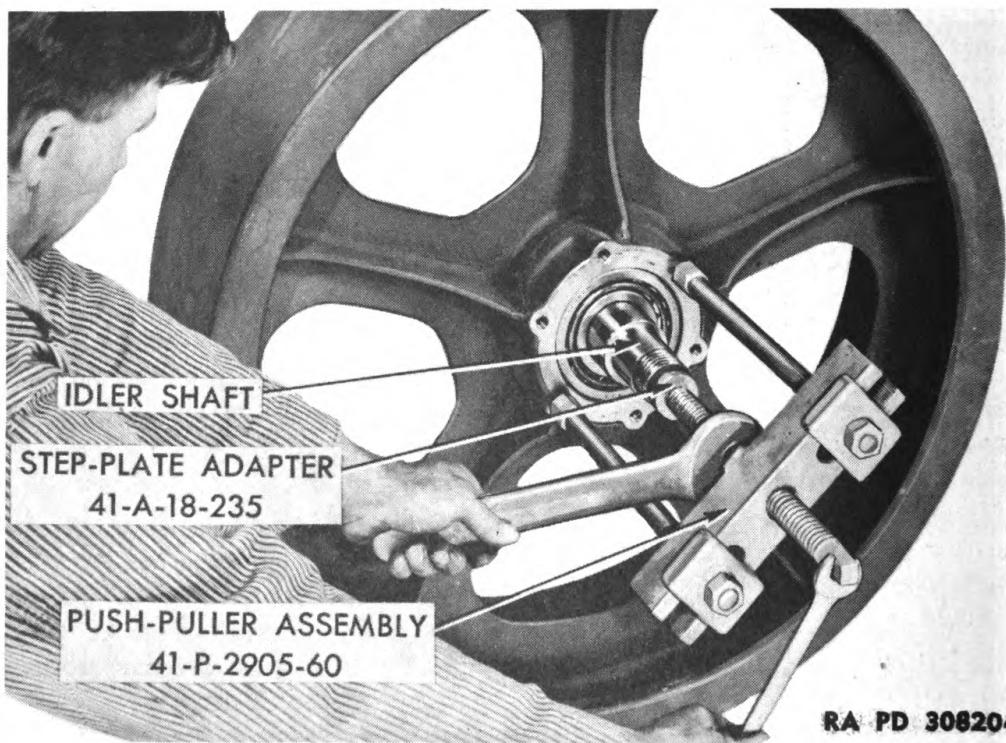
Removing Guide Bushings From Idler Shaft,
